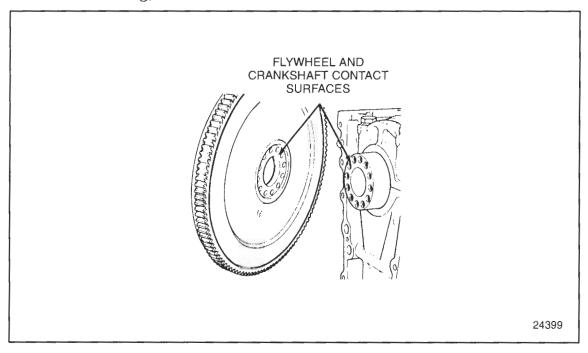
Crankshaft and Flywheel Mating Surfaces
